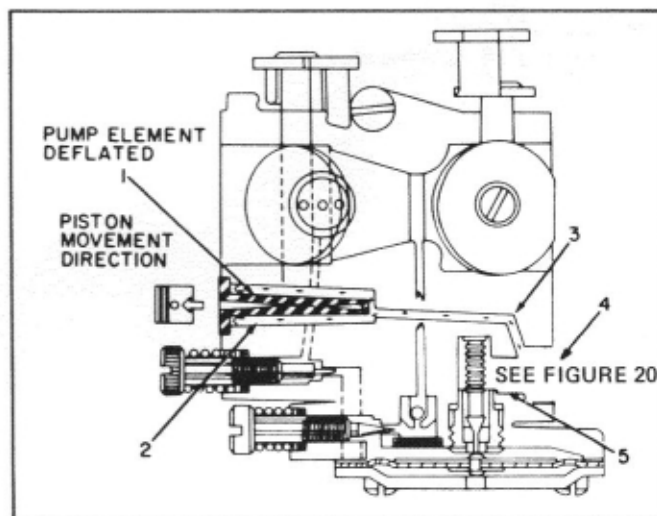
Diaphragm Carburetor with Fuel Pump Deflated
